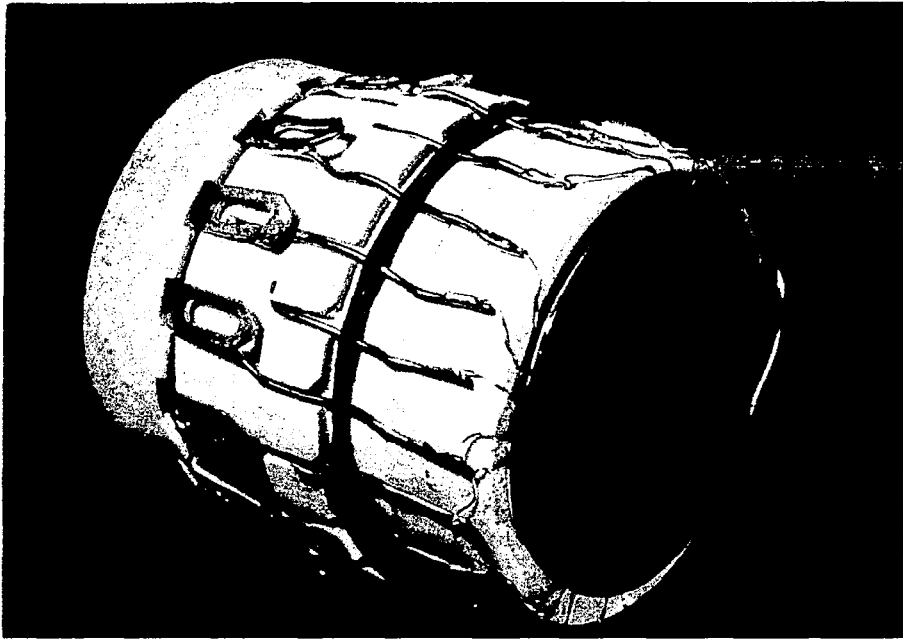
Wafer and Header Attached Together and the Gold Wires Soldered to the Respective Pins
